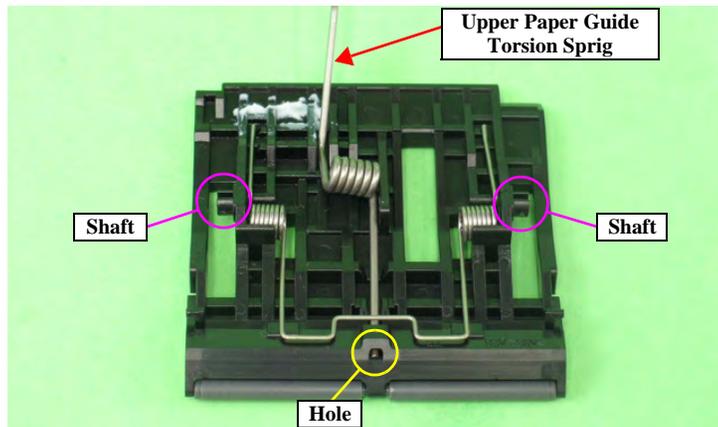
Reinstalling the Upper Paper Guide Torsion Spring
